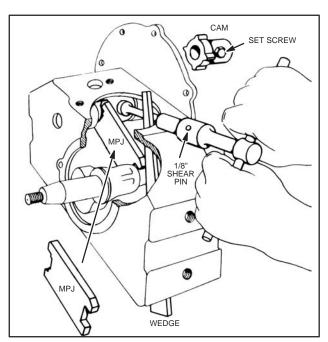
ASSEMBLE CAM GEAR, MODEL PB
